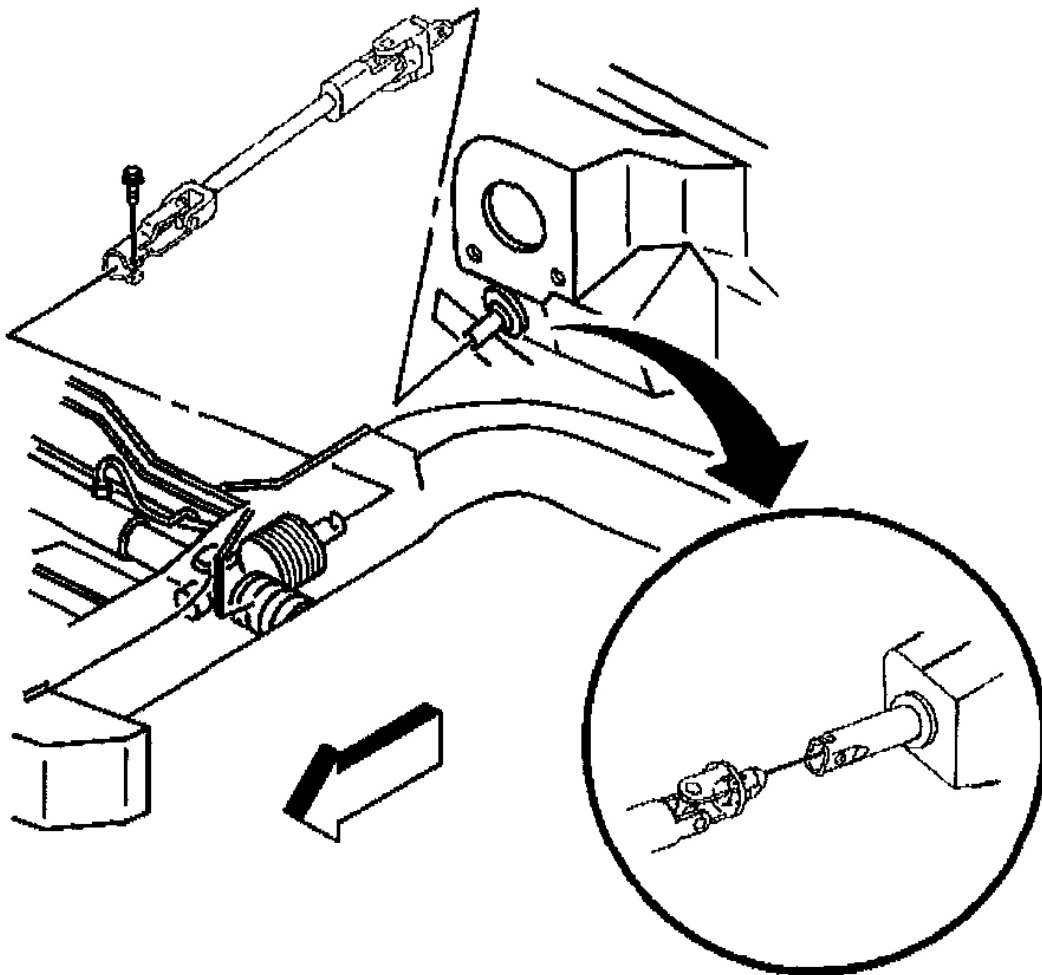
Installing Lower Steering Column Support Plate Nuts
